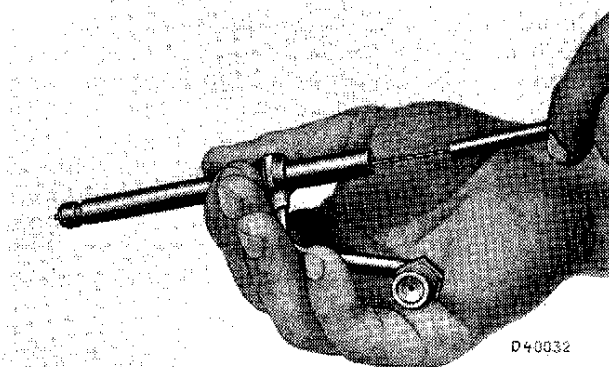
Cleaning the Sac Hole in Nozzle Body with Special Tool No. 16476
